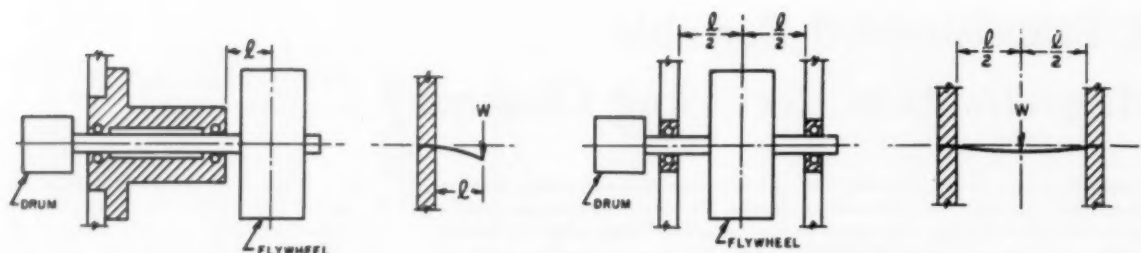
(Left) Film drum coupled to flywheel supported cantilever fashion; (Right) Flywheel located between two bearings ("matched plate" method).
